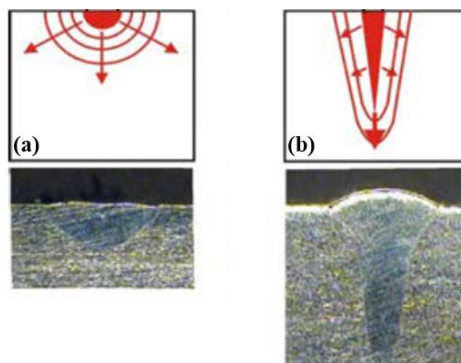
Different laser welding modes a) conduction b) keyhole [19]
